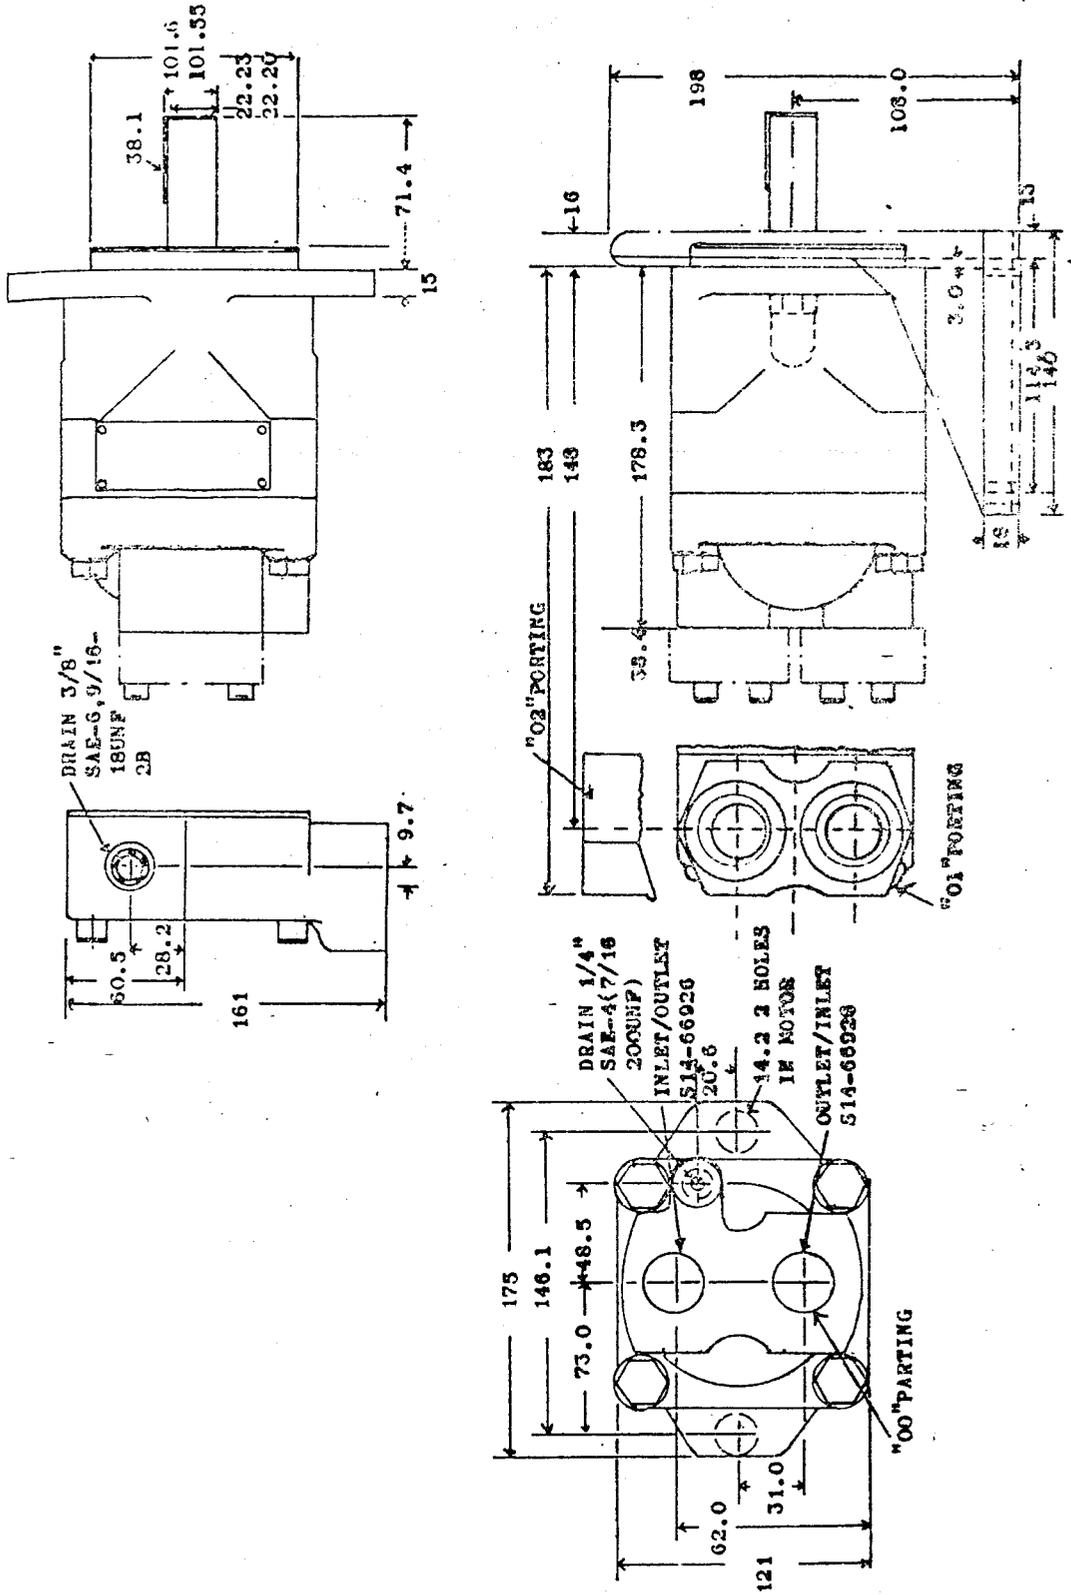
Specification of hydraulic motor, Denisec H92-053
